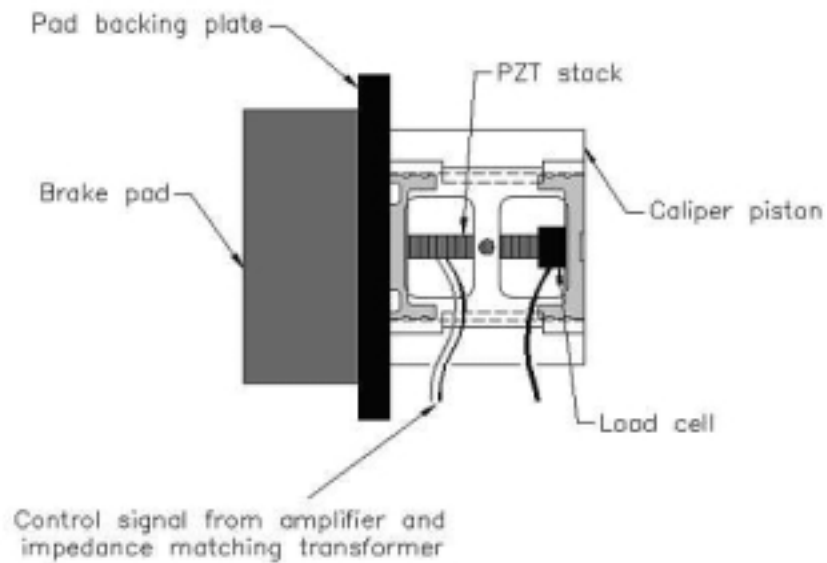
PZT control system assembled inside the caliper piston [27]
